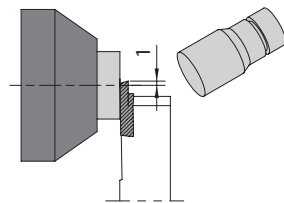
(When the tool edge has proceeded 1 mm beyond the center of workpiece)
